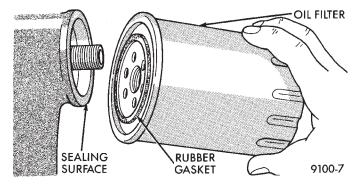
Oil Filter Sealing Surface—Typical USED ENGINE OIL DISPOSAL
